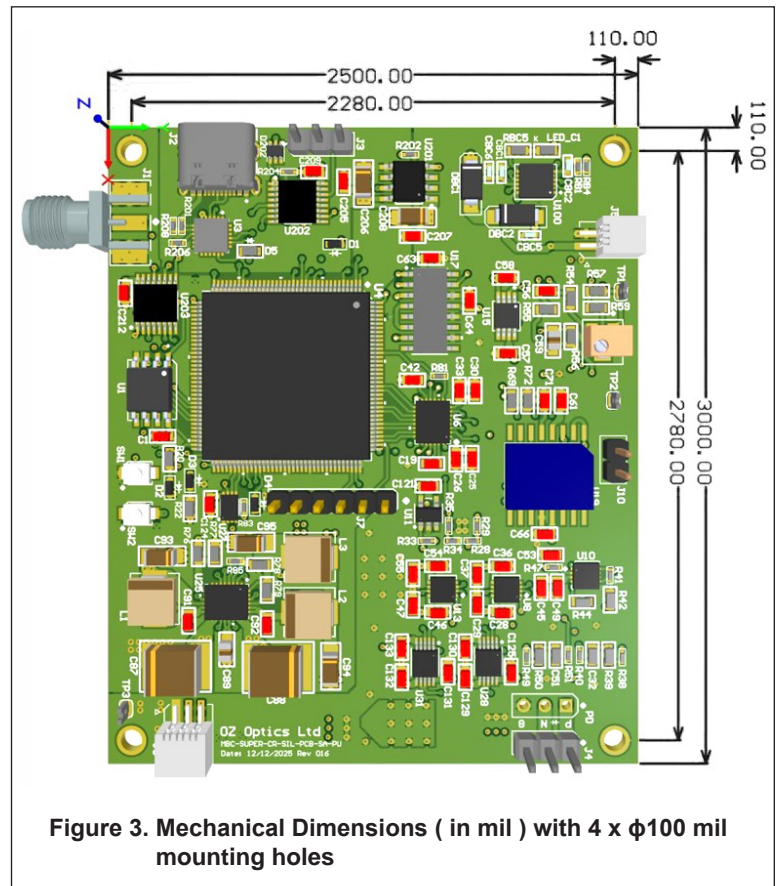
Mechanical Dimensions ( in mil ) with 4 x  $\phi 100$  mil mounting holes
